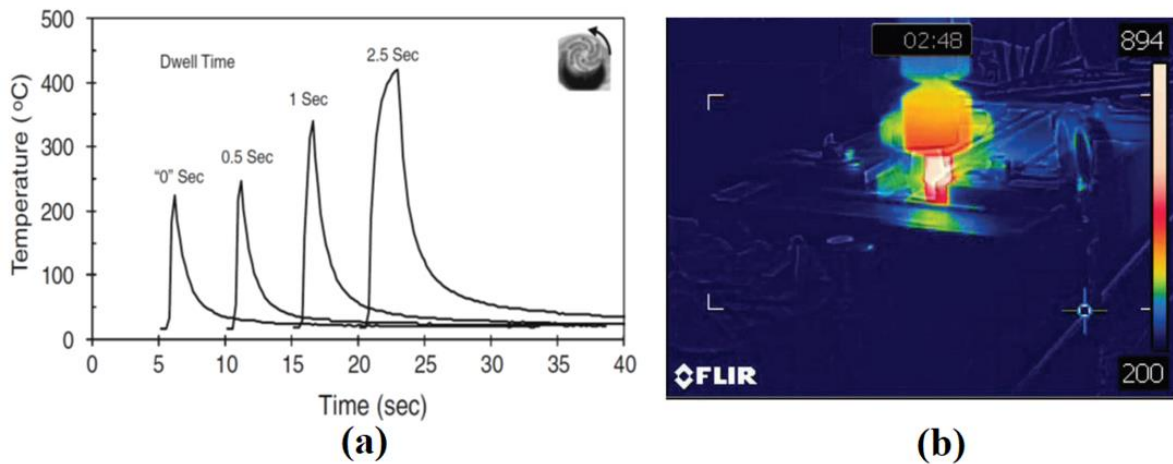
(a) Thermocouple measurements from the base of the weld obtained with a pin-less long flute wiper tool for different welding times [20]; (b) the temperature of the tool workpiece set-up during FSW ($^{\circ}\text{C}$) [92]
